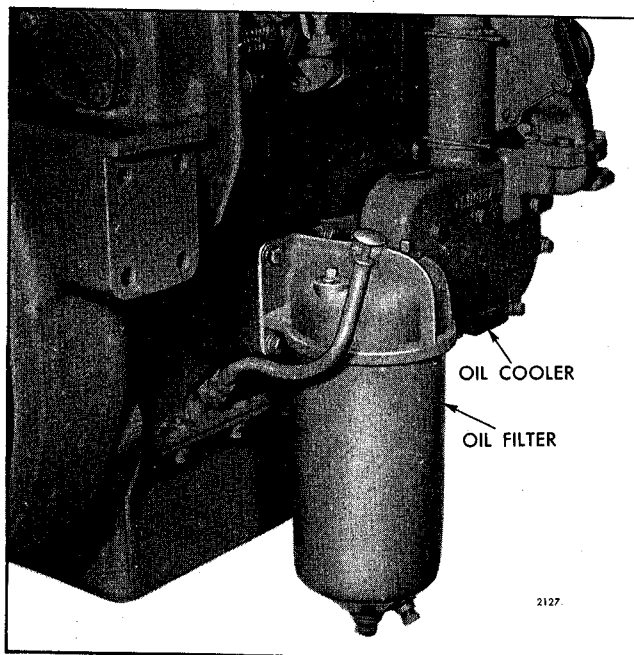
Typical In-Line Engine Oil Filter Mounting
